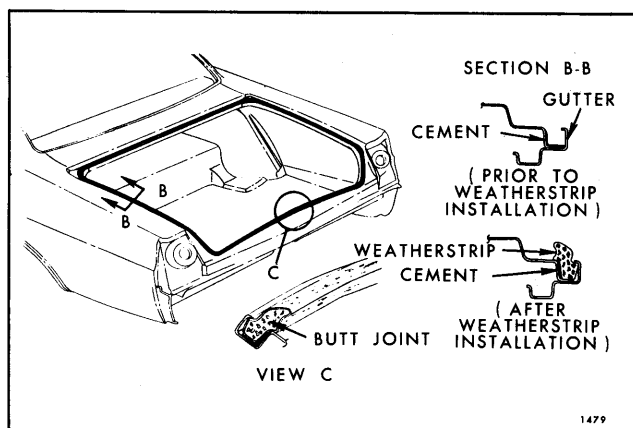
Rear Compartment Weatherstrip Assembly
